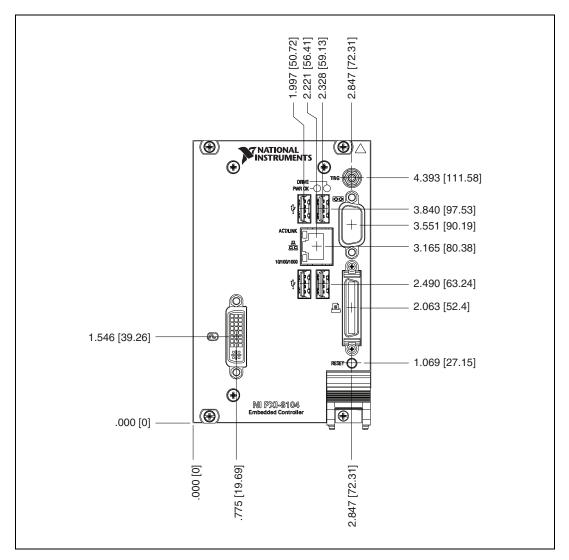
NI PXI-8104 Front Panel Layout and Dimensions
